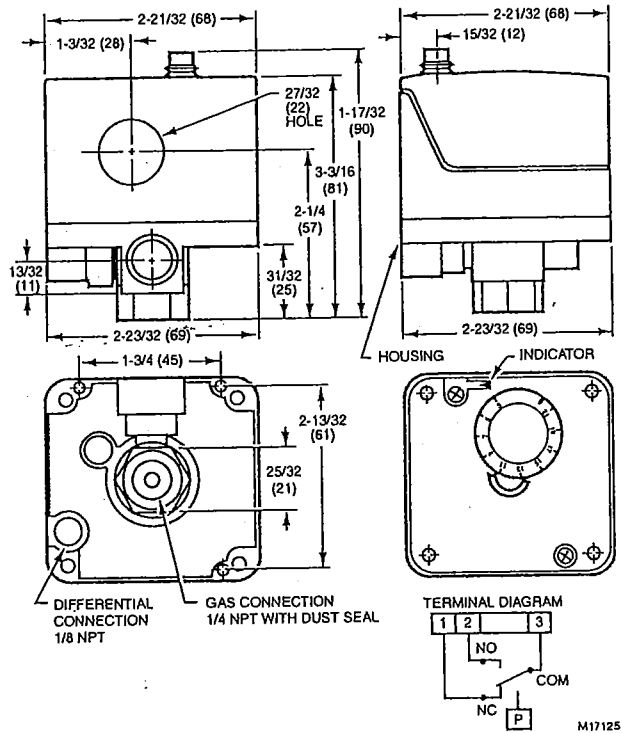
C6097 1/4 in. NPT Mount dimensions in in. (mm).
